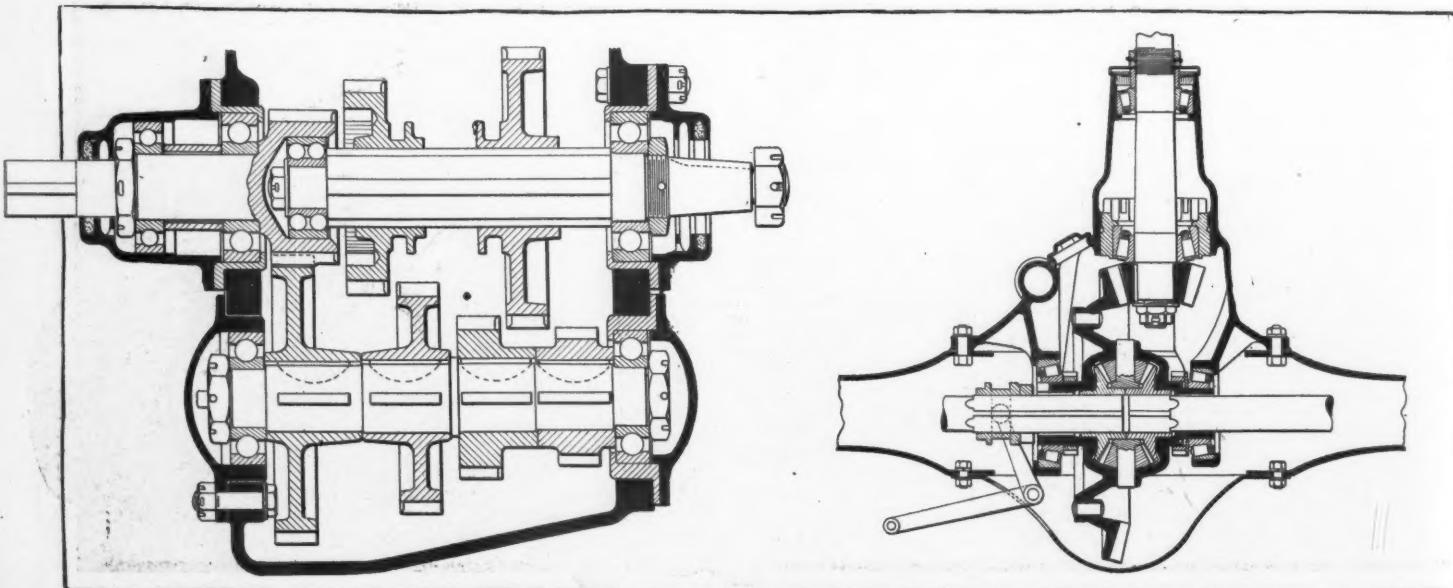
SECTIONAL PLAN VIEWS OF SPEEDWELL TRUCK GEARSET AND JACKSHAFT MECHANISMS
